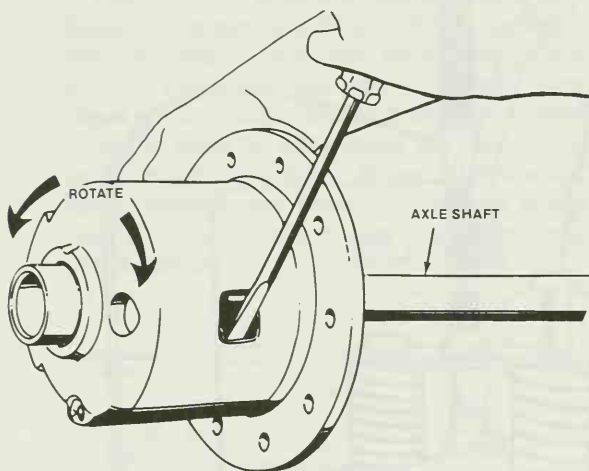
Removing the pinions by prying with a screwdriver. (Pontiac Motor Division of General Motors Corporation)
